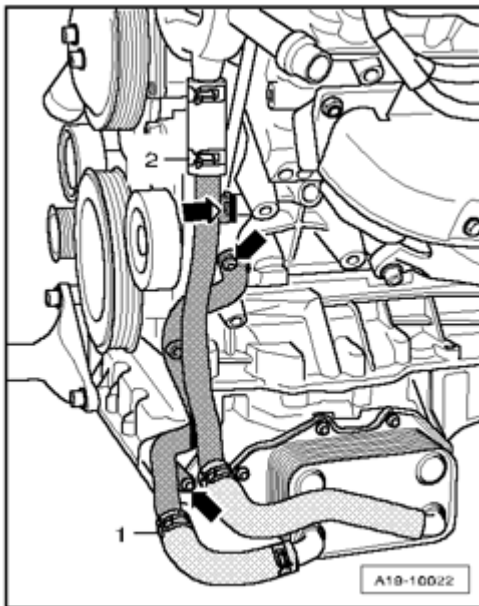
Removing Bolts And Coolant Pipe From Engine
